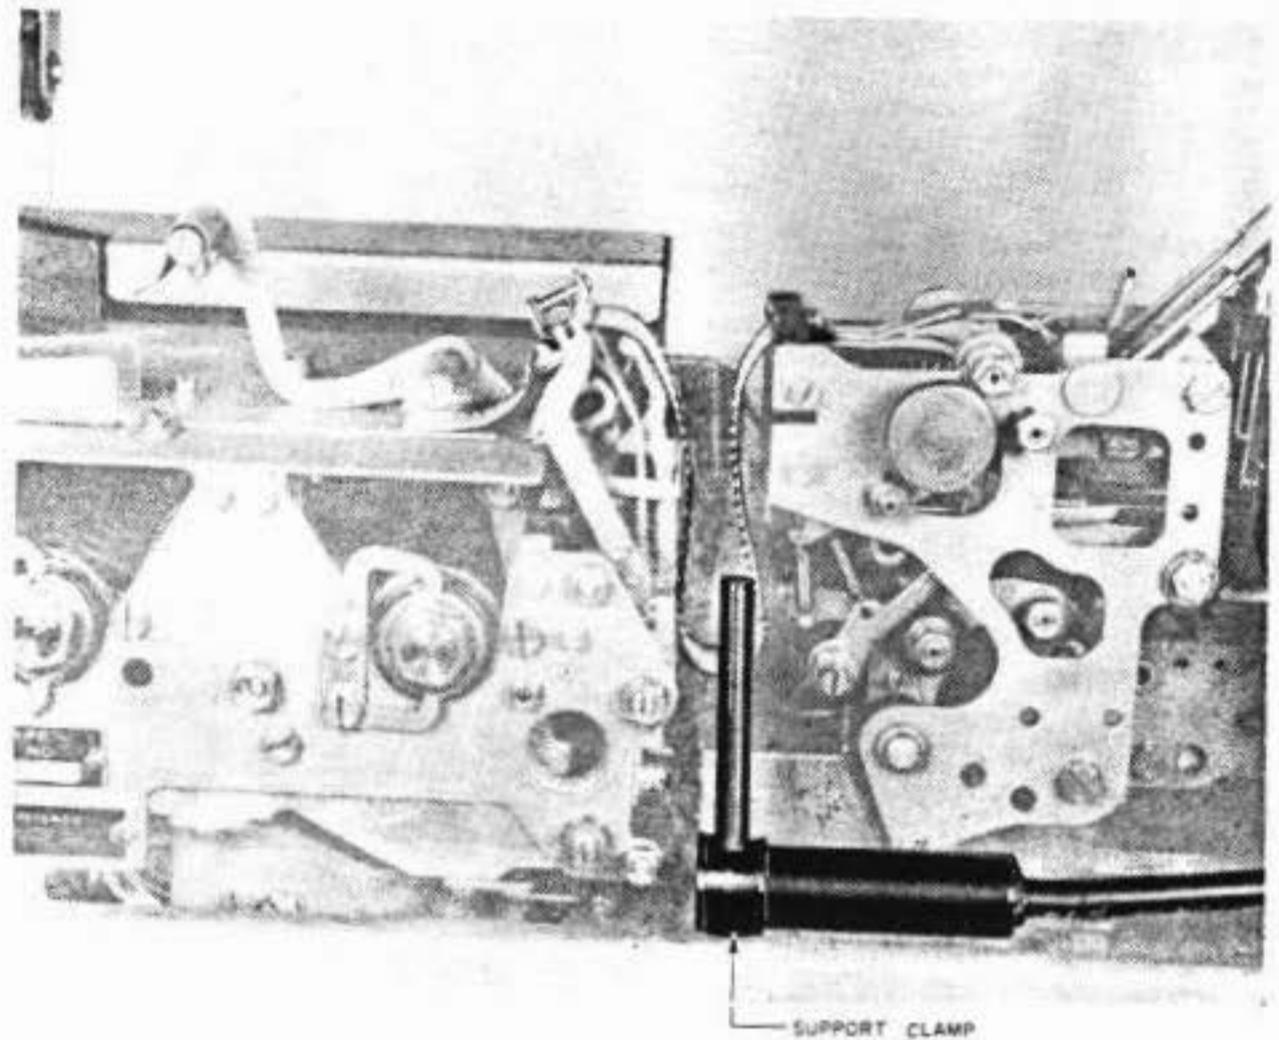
Inductor Point Mounted on 28 Reperforator-Transmitter
